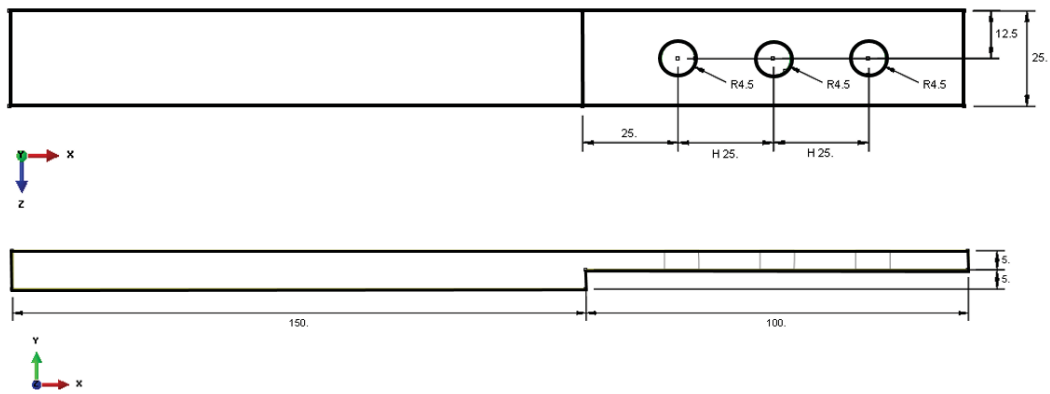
Dimensions of the beam utilized in three bolted assembly [mm]
